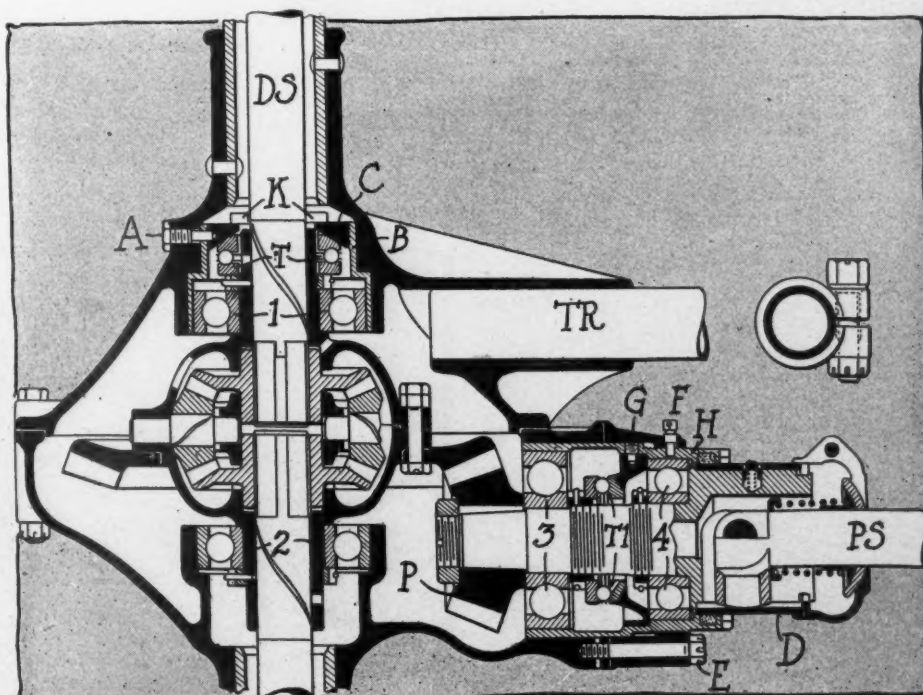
SHOWING THRUST BEARINGS ADJUSTMENTS ON LOCOMOBILE CARS
